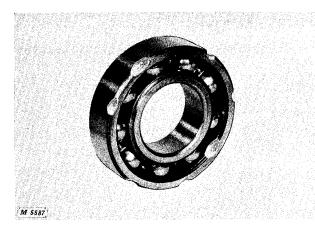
Nicks in Outer Race Caused by Using Chisel or Drittpin to Remove or Install Bearing
